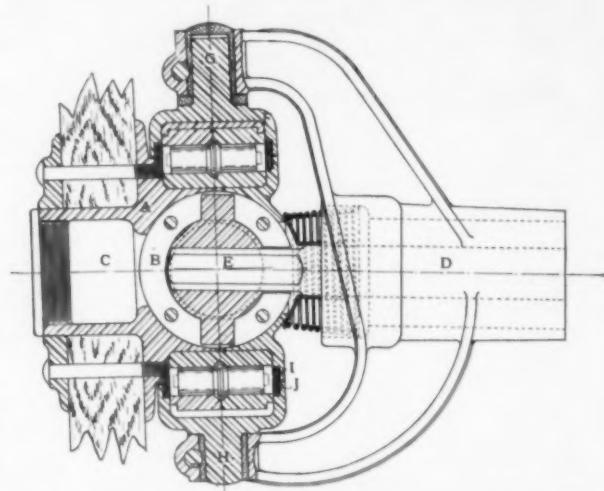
Sectional View of Universal-Joint Driving Arrangement in Front Hub
